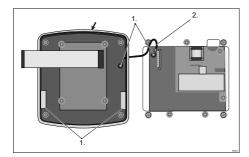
With control panel installation: Fit the profile seal onto the top part of the controller housing
